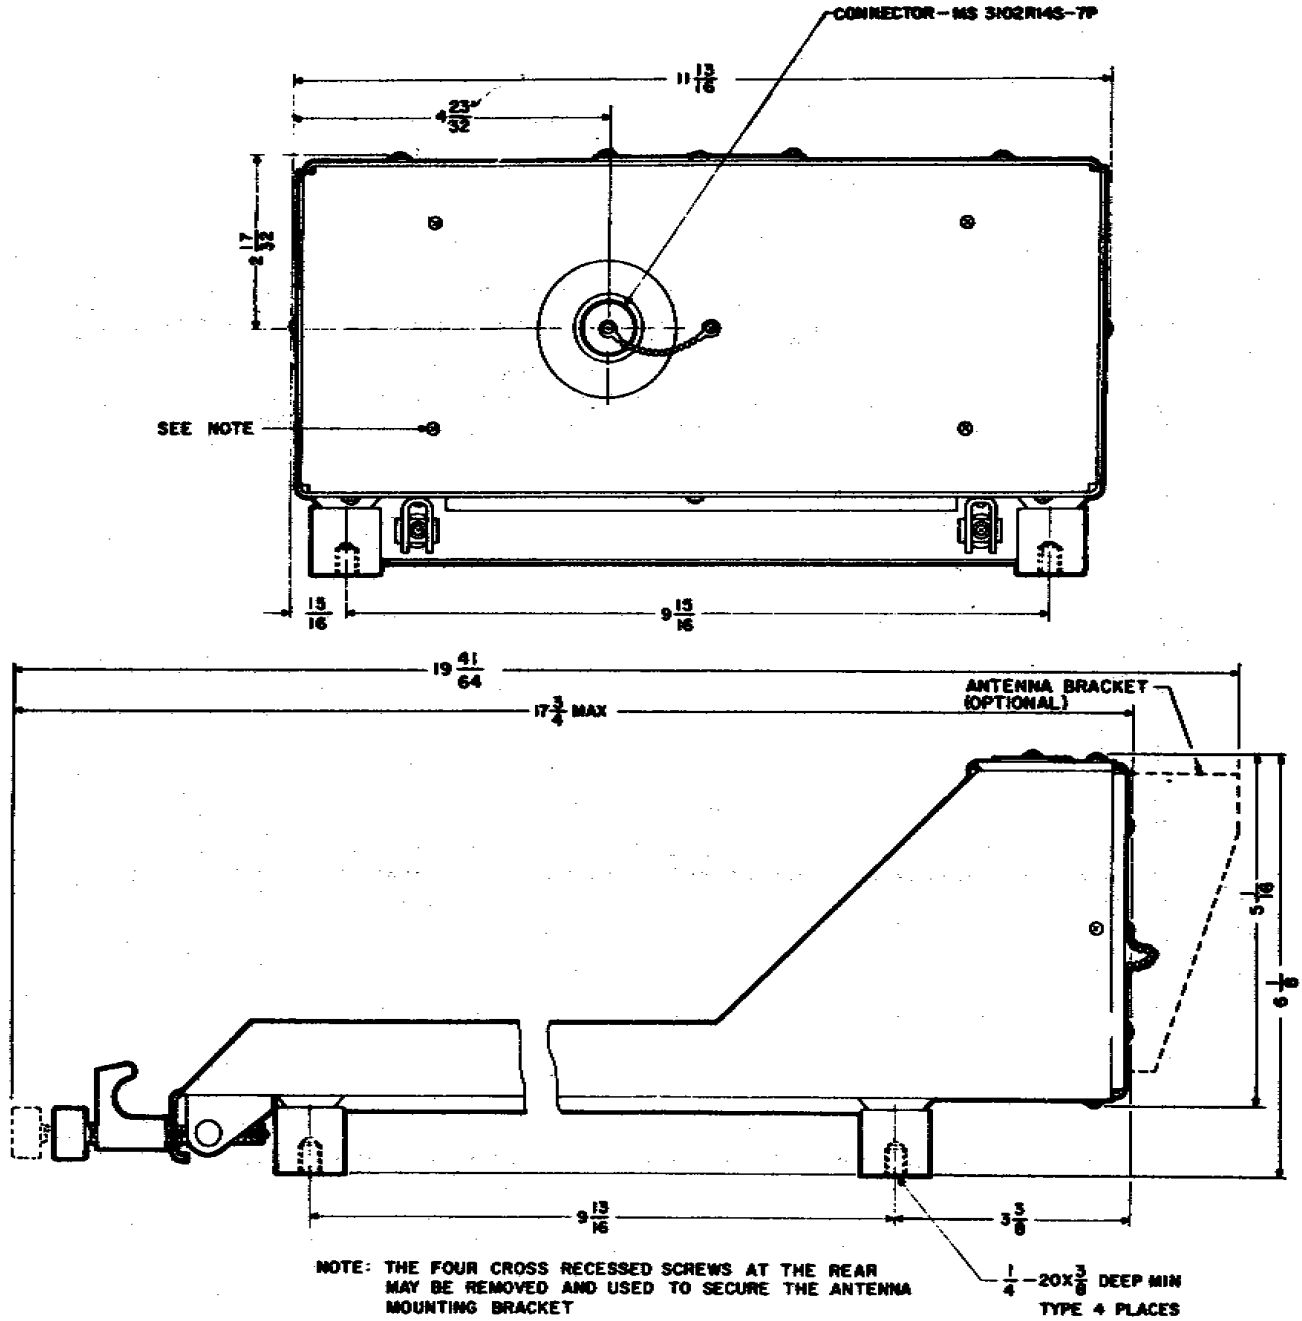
Mounting MT-2976/PRC-41, Outline and Mounting Dimensions
